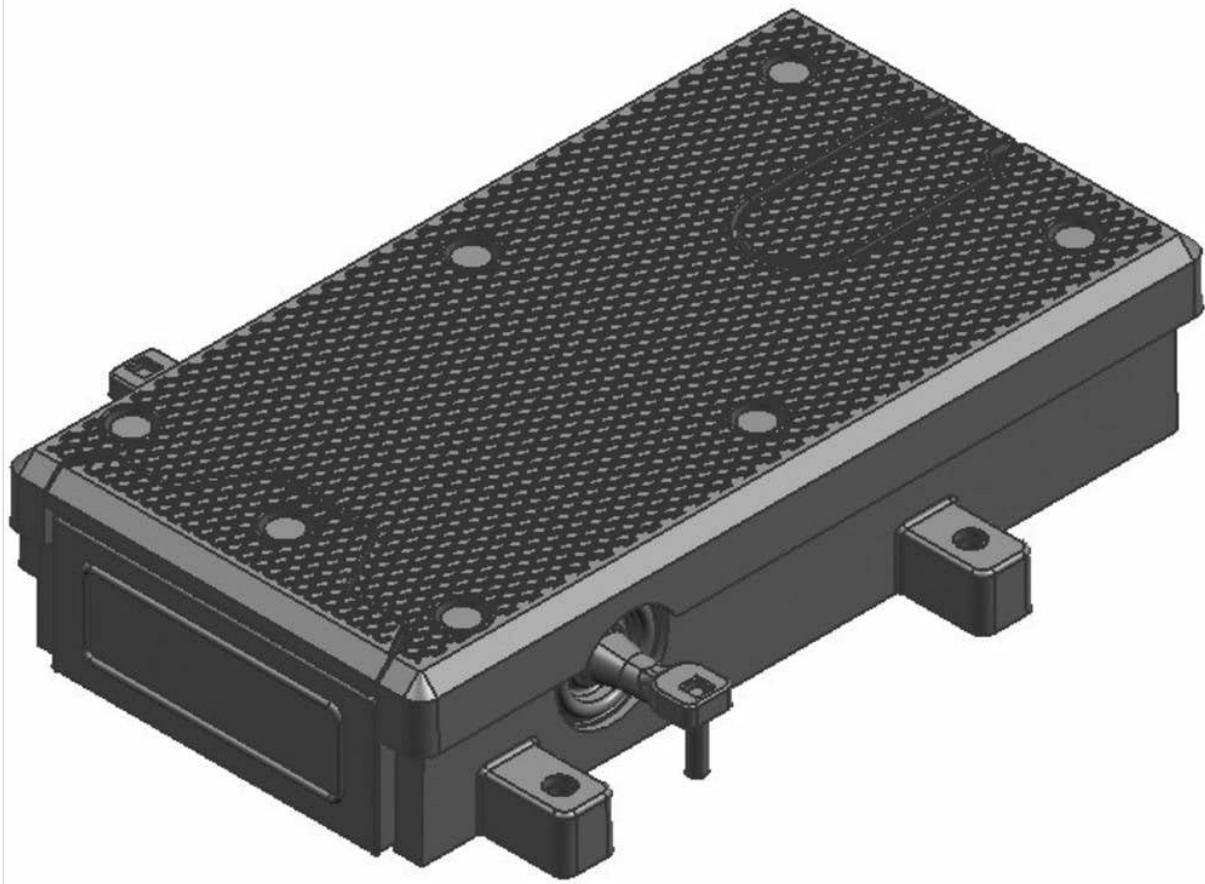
Main unit of the Piko 35271 G Electric Switch Drive. This image shows the overall appearance of the switch drive, typically a compact black or dark-colored housing with connection points.
